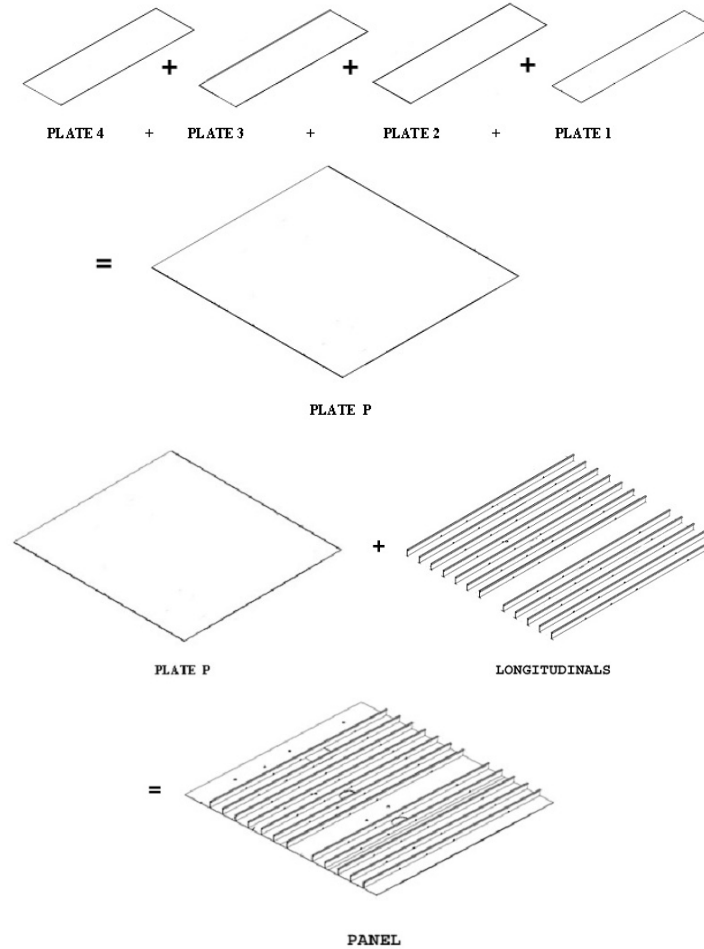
Flow of material during the assembly of the double bottom block for the Crane barge in 3.Maj shipyard [30]
